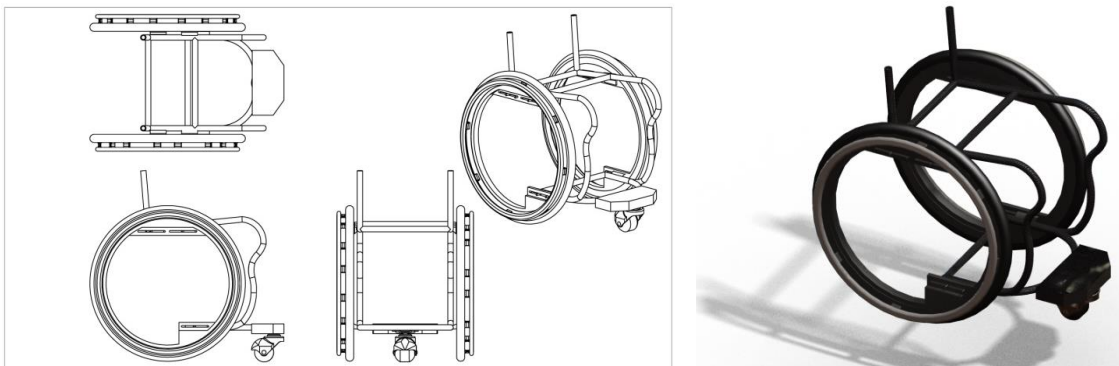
Manual Wheelchair CAD Drawings and Prototype Made from Composite Materials.
